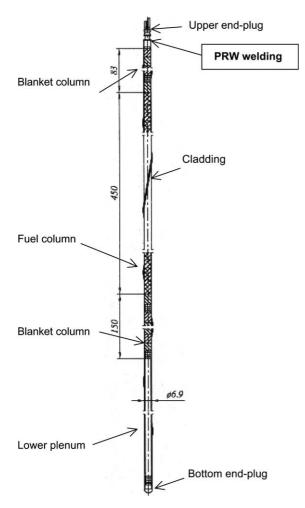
Fuel pin for the BOR-60 irradiation test, showing PRW welding at upper plug/cladding.
